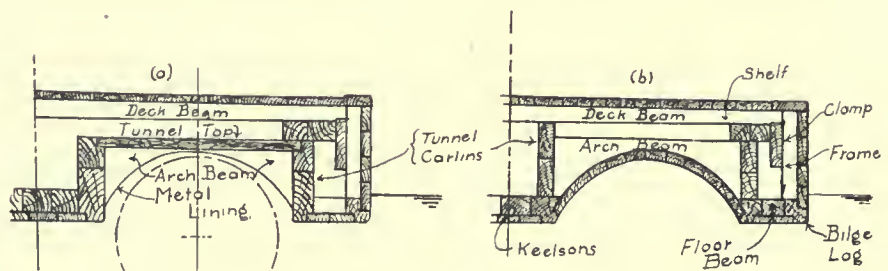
LONGITUDINAL SECTION OF WOODEN TUNNEL STERN BOAT
